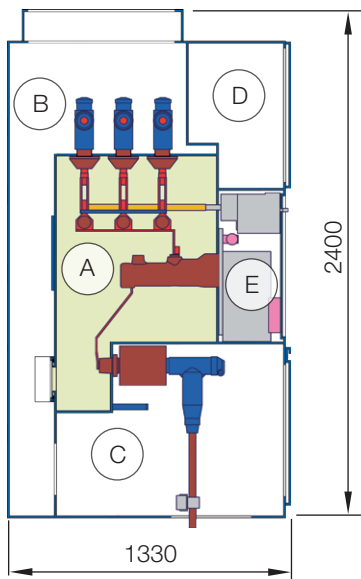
Incoming cable panel 1600 A with voltage transformers on the busbar and on the outgoing feeder (wall mounting installation)
